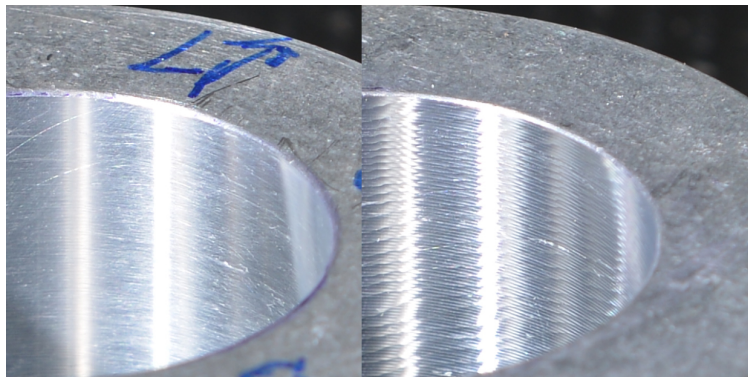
Actual workpieces: the left is a clean cut, and the right is a chattered piece.
